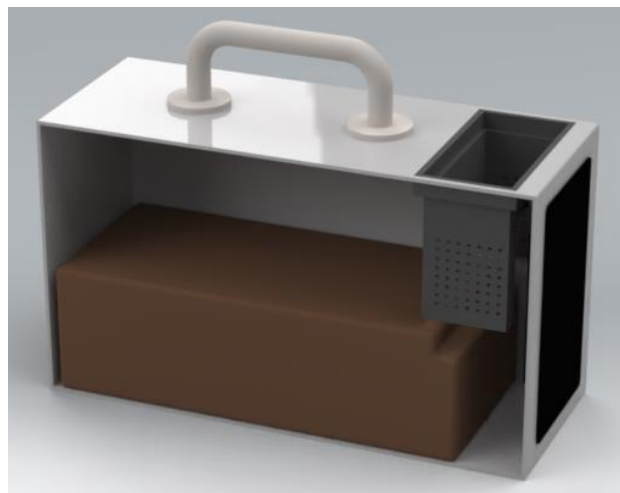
Casing made with sheet metal, handheld BESS concept 2.
